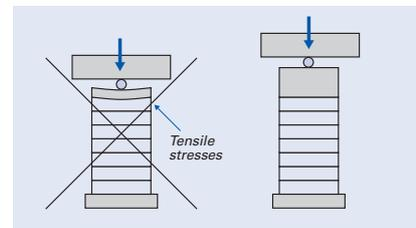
Proper dimensioning of the end pieces in the case of point contact
